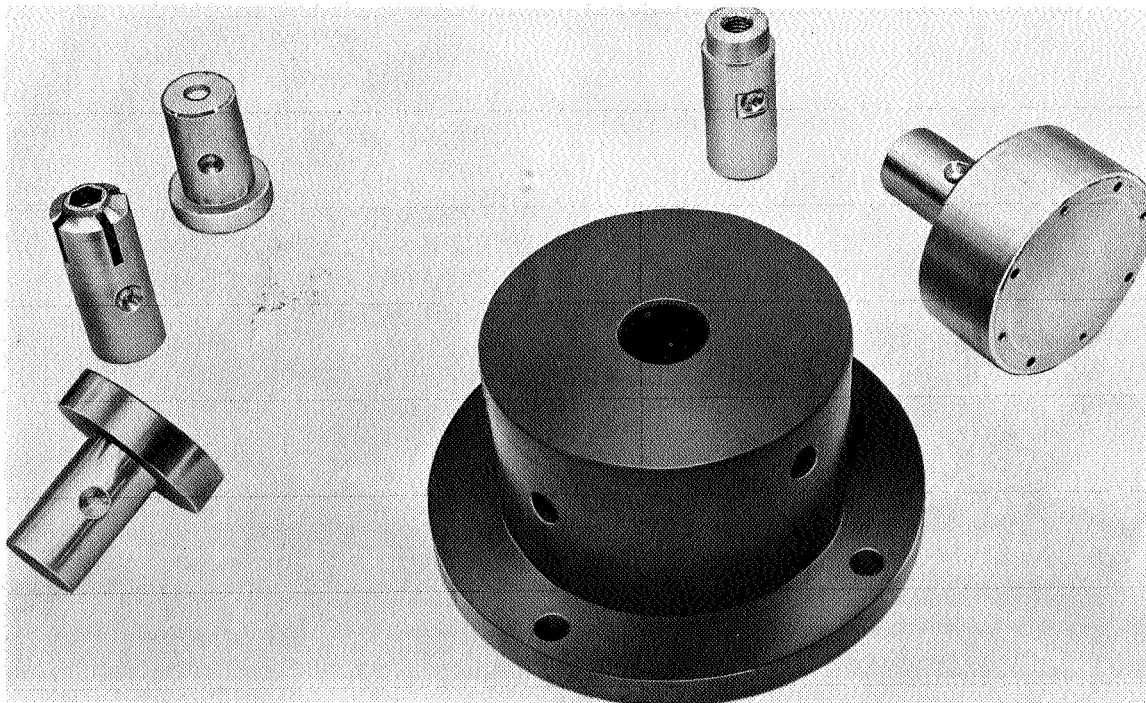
Lathe and jig bore fixture holder and variety of one-inch brass inserts.
